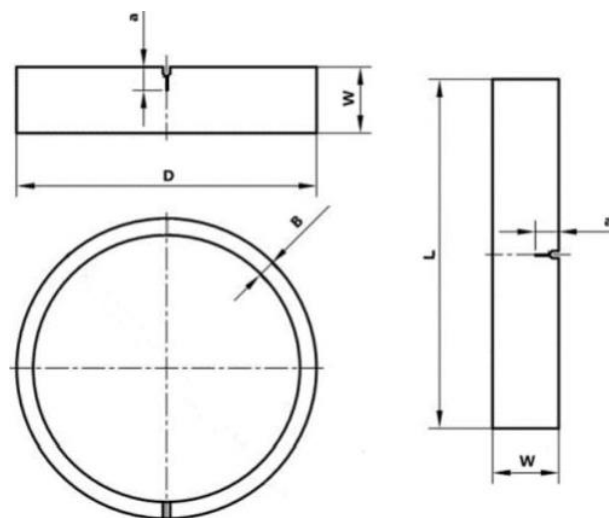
Drawing of PRNT specimen (left); SENT specimen (right), /13/.
